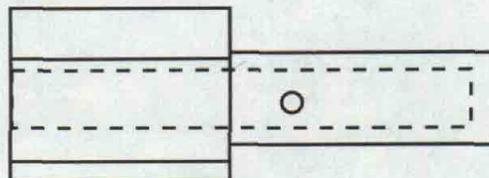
This is the part of the tool that goes into the tube. You need to use your calipers and measure the inside diameter of the tube you are going to bead, then, using the lathe, turn the body of the tool to that dimension.
